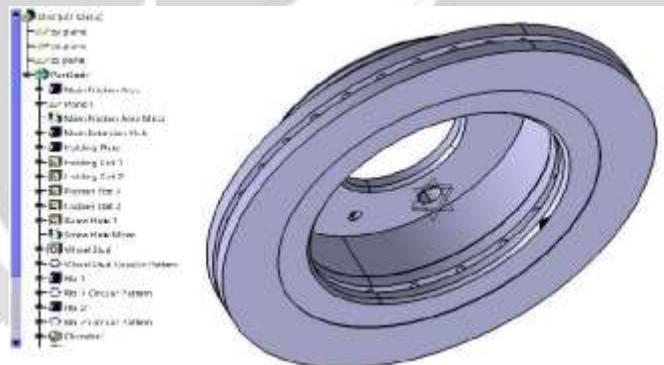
Model of Disc Brake Rotor (Using CATIA-V5R21)
